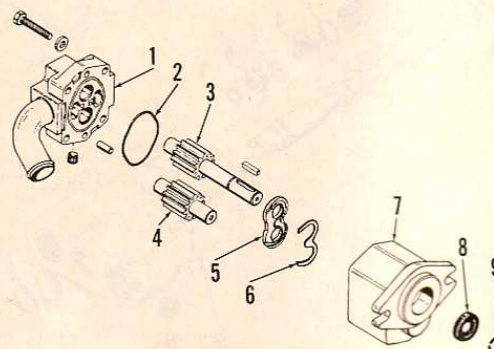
Exploded view of typical Borg-Warner hydraulic pump used on some model 224, 444 and 446 tractors.
